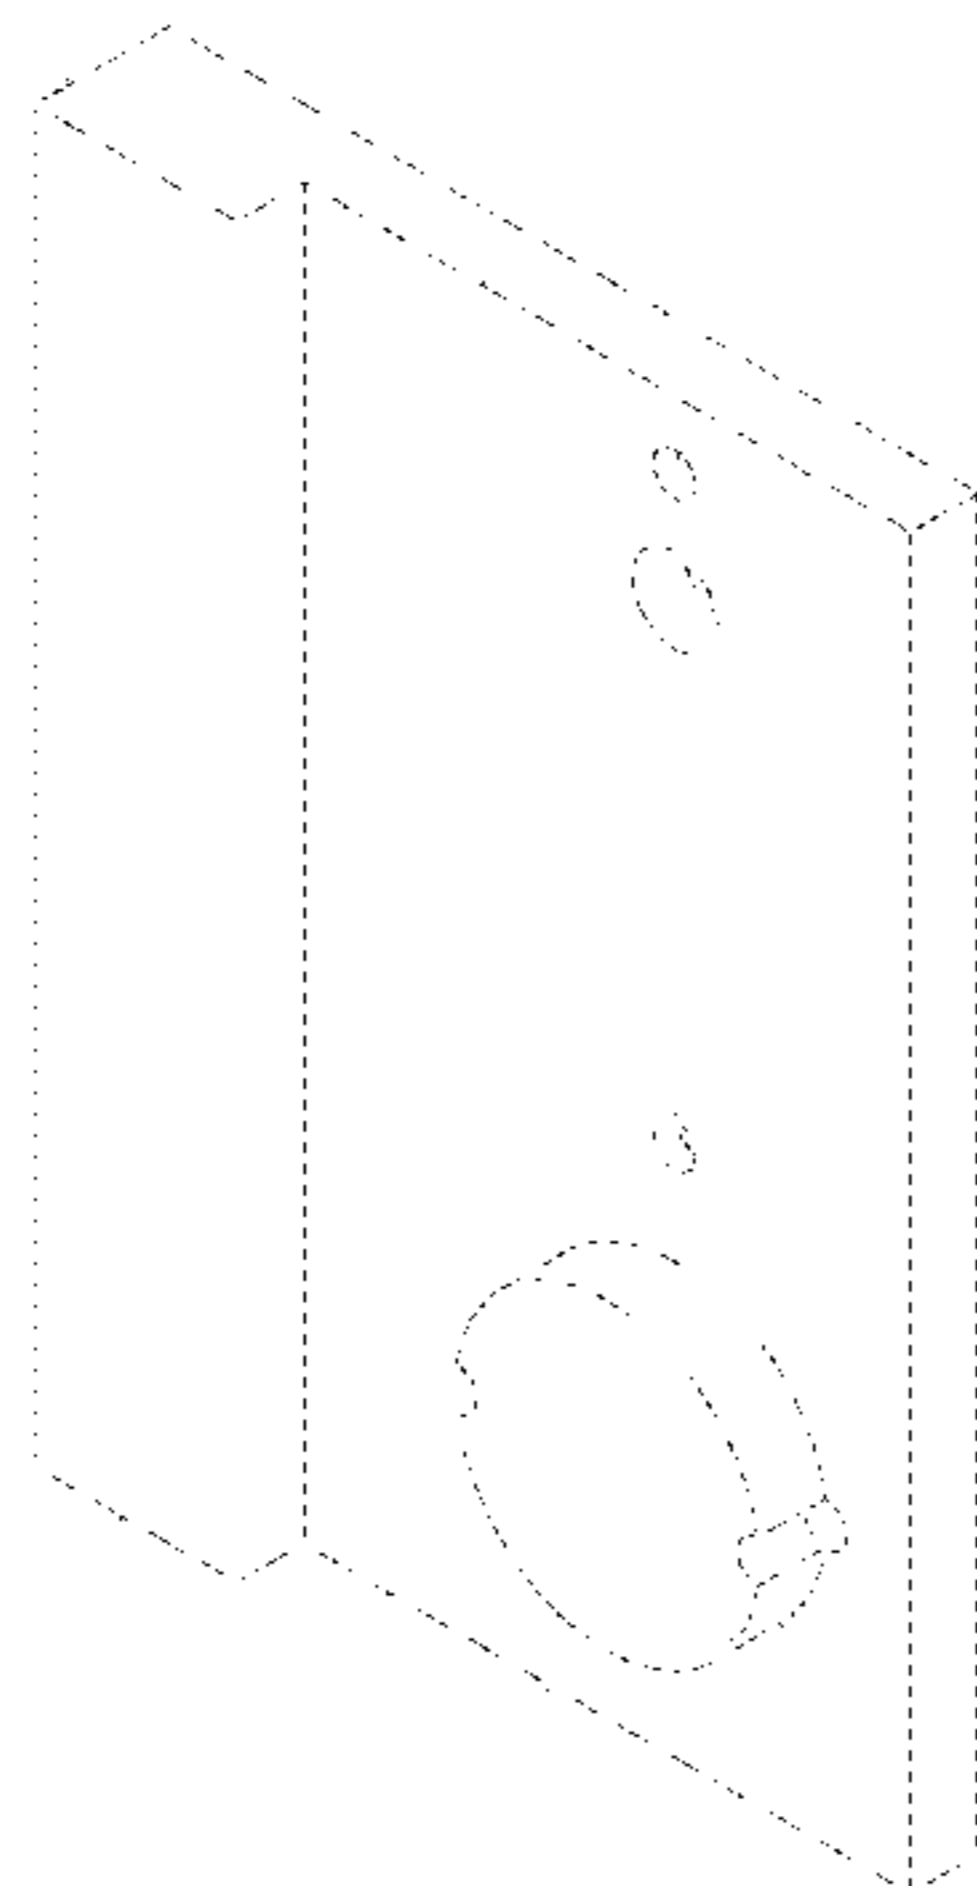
is a right, top perspective view of a view of an embodiment of my new door component installation jig having two holes through the left side.
